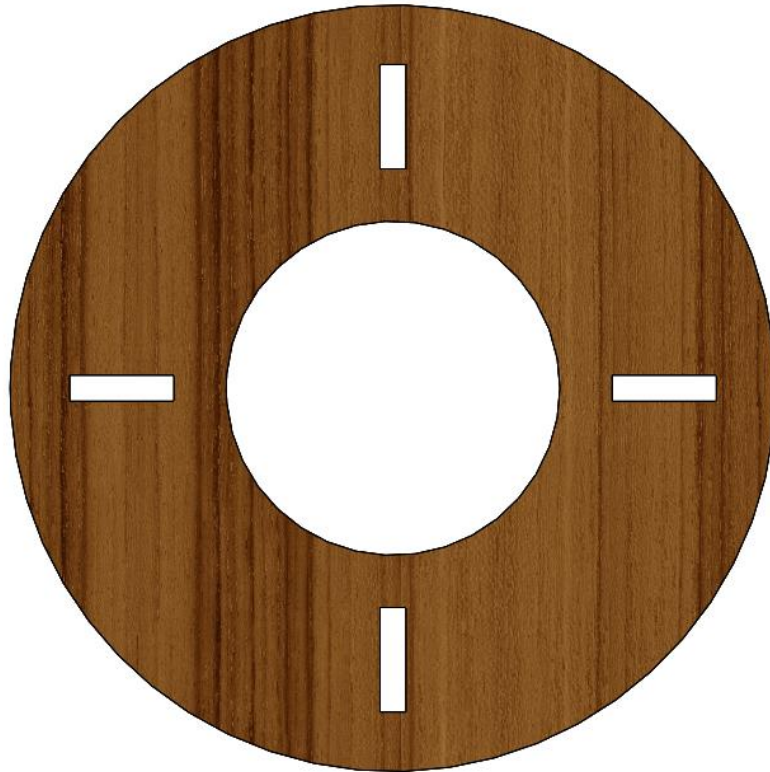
Motor Tube Centering Ring with Cutouts for Fin Tab Notches
